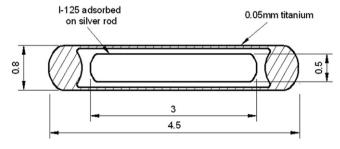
Schematic drawing of the seed to be produced by IPEN (Rostelato, 2005). Dimensions in millimeter.
